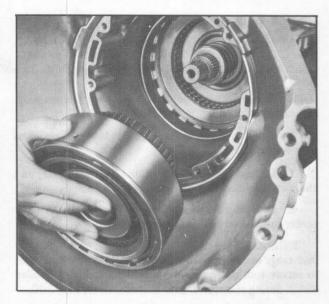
Removing Direct Clutch and Intermediate Roller Assembly
